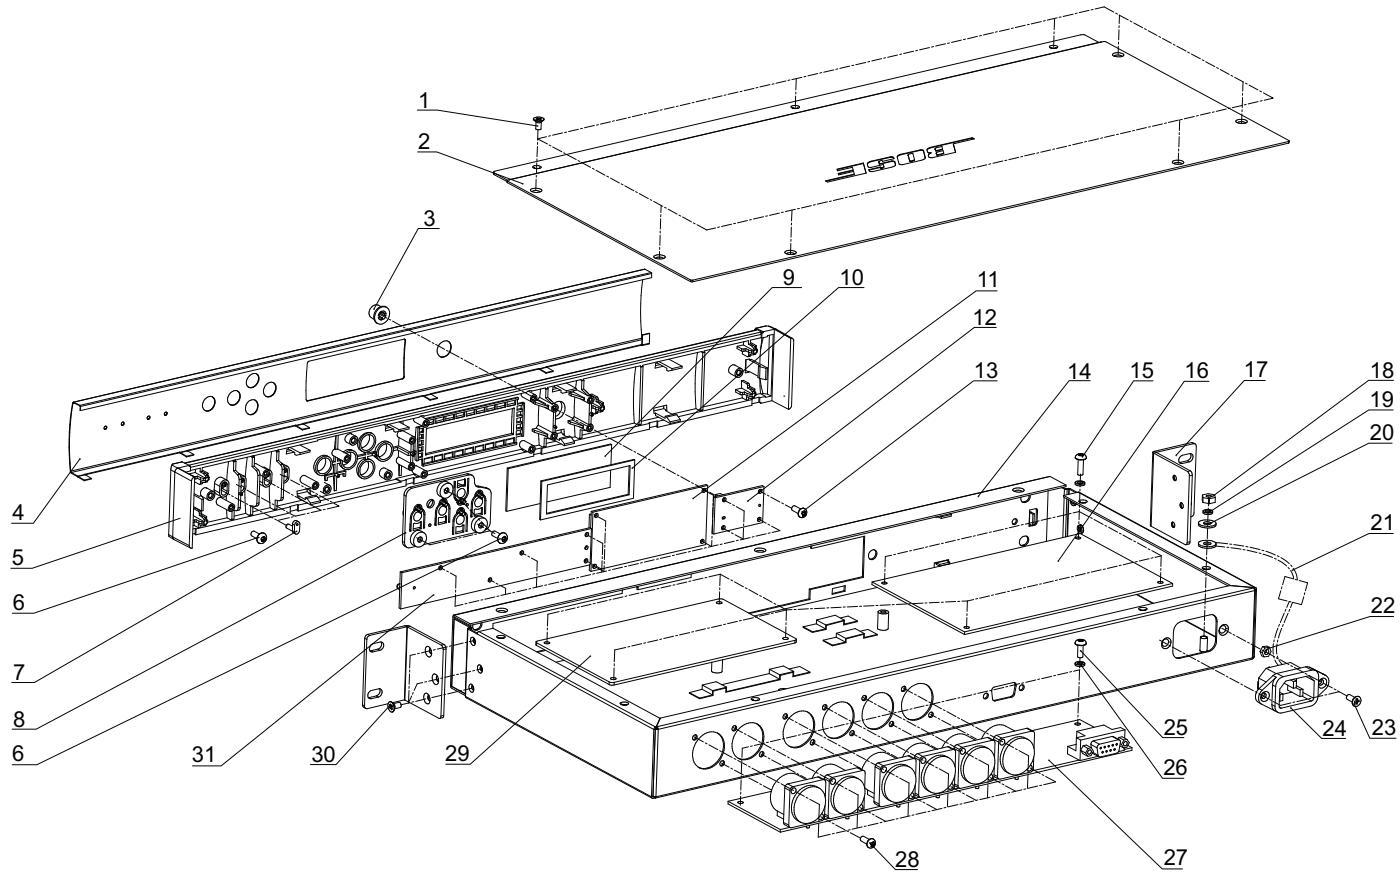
ControlSpace SP-24 Sound Processor Exploded View
